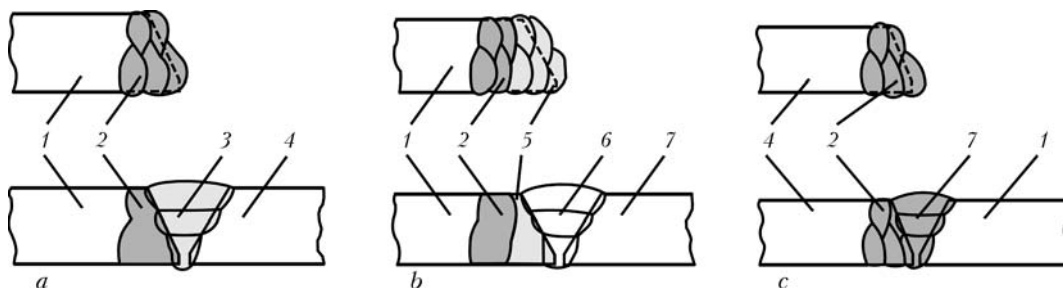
Schemes of first (a), second (b) and third (c) technologic variants of welded joints of dissimilar steels: 1 – base metal (steel 20); 2 – hard-facing of Armco-iron; 3 – weld made using filler metal Sv-10Kh16N25AM6; 4 – base metal (steel 08Kh18N10T); 5 – hard-facing of filler metal Sv-10Kh16N25AM6; 6 – weld made using filler metal Sv-04Kh19N11M3; 7 – weld made using Armco-iron as a filler metal
